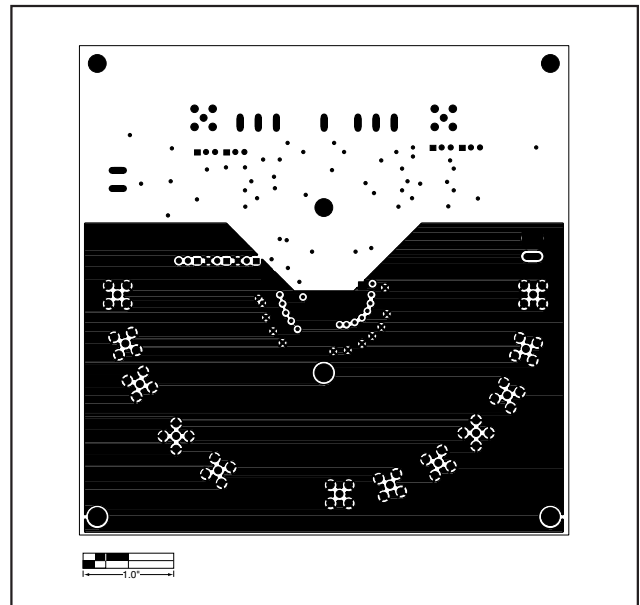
MAX5183 EV Kit PC Board Layout—DGND Plane (Layer II)
